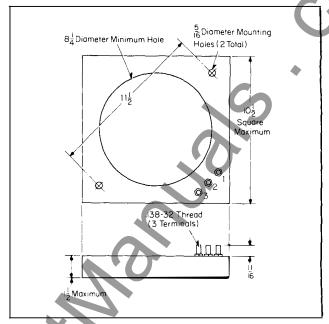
Mounting Dimension for S# 179C767H01, H02
